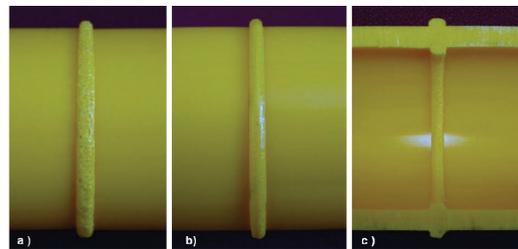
a) Inappropriate welding parameters b) Appropriate welding parameters c) Appropriate welding parameters and pipe internal surface appearance [18]
